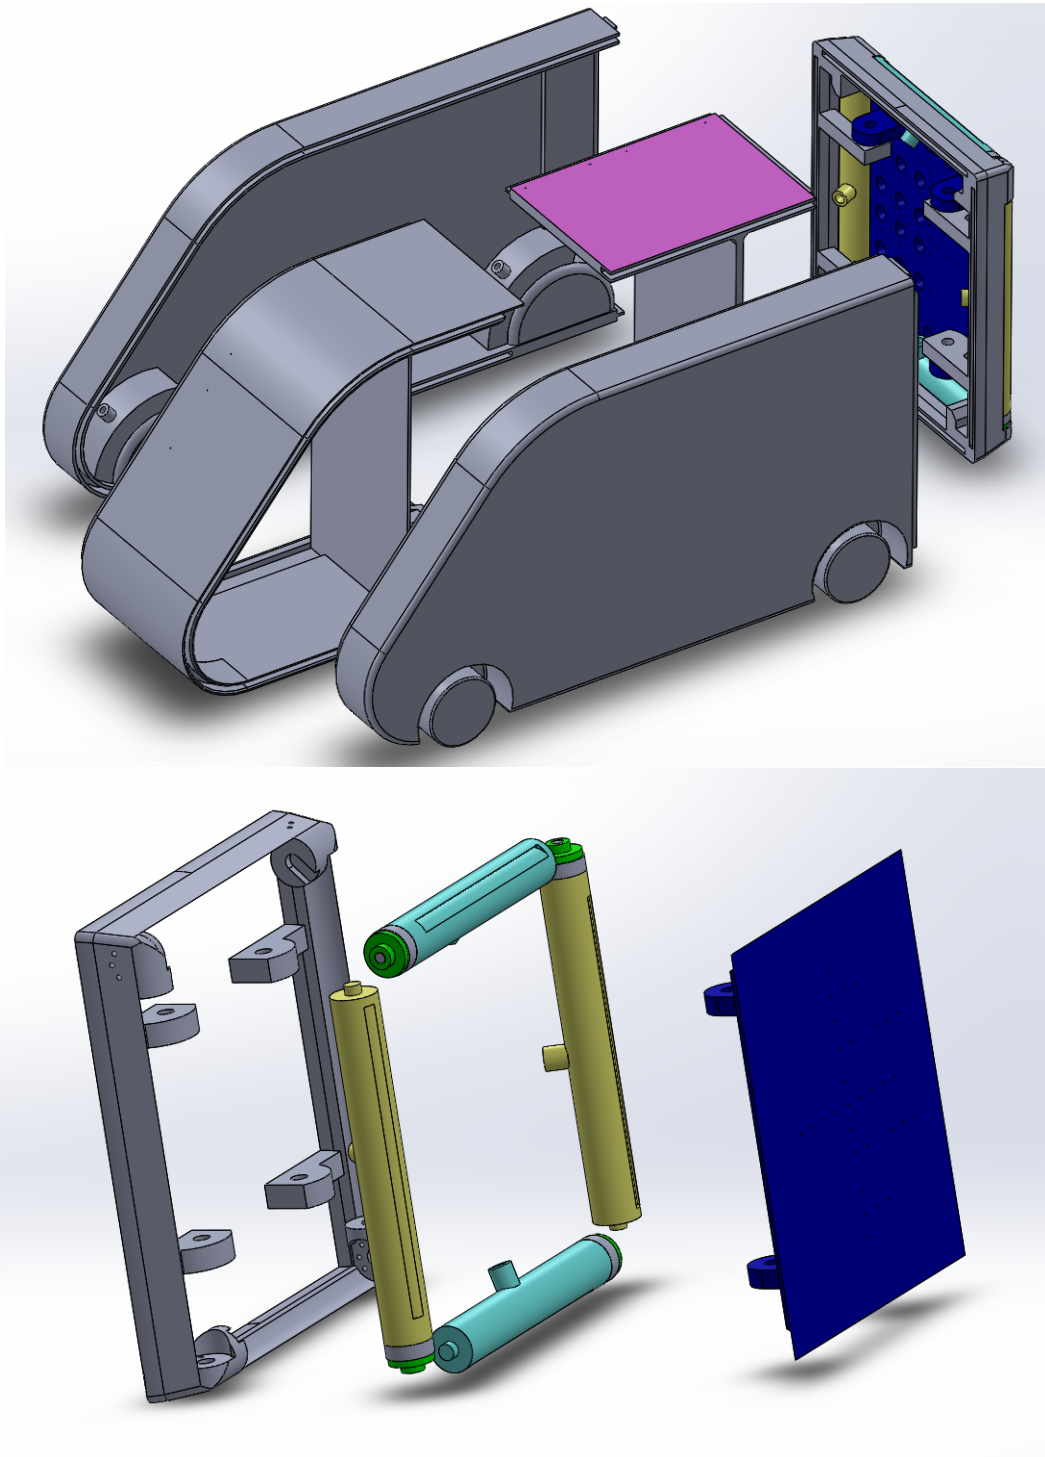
Exploded components of the 3D model of the front and rear components.
